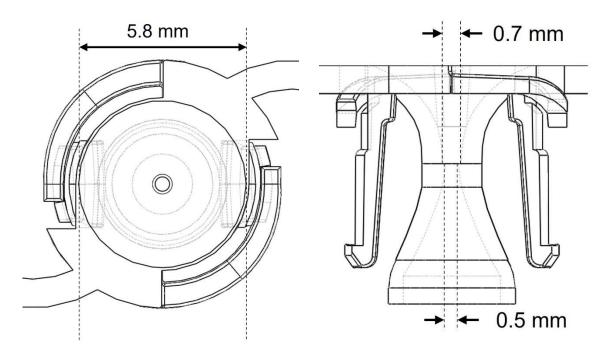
A. Top view well opening. B. Side view of hourglass shaped well.
